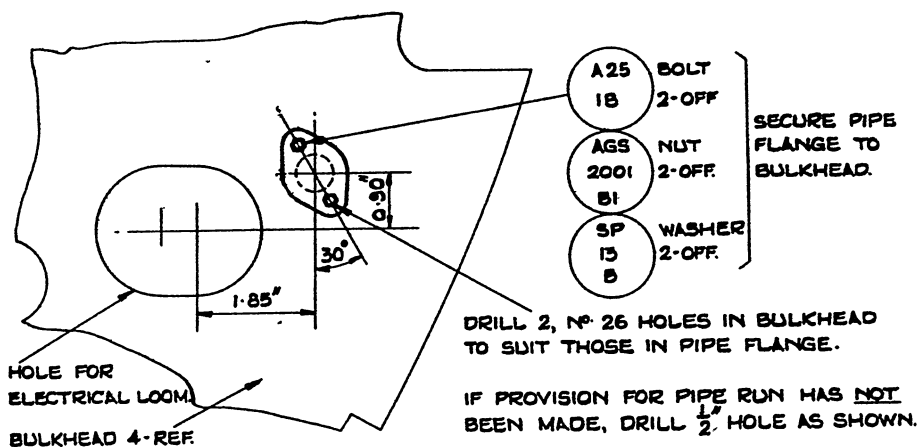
DETAIL 'B'-(REFER TO SHEET 1) APPLICABLE ONLY TO AIRCRAFT NOT EMBODYING PROVISION FOR TOTAL HEAD AIRLINE.
